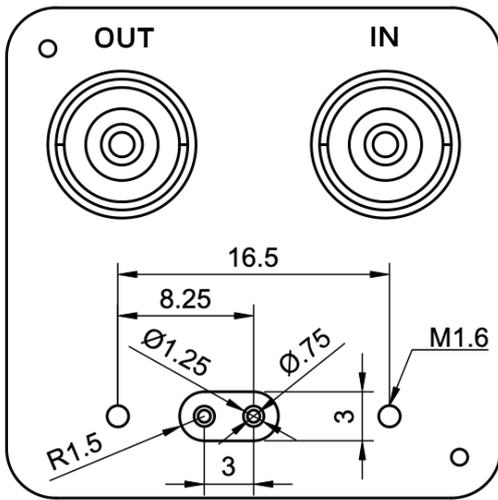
Fluidic interface (Luer-adapter) with indicated fluidic inlet and outlet. All units in mm.
